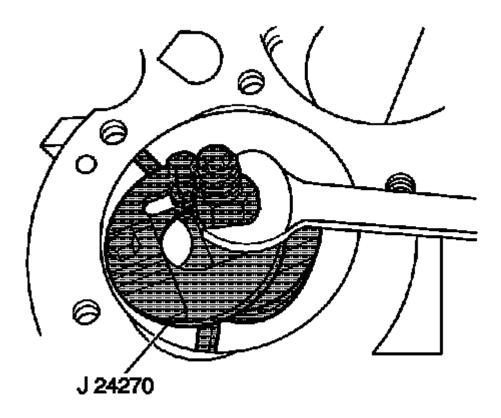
Removing Cylinder Bore Ring Ridge Courtesy of GENERAL MOTORS CORP.
